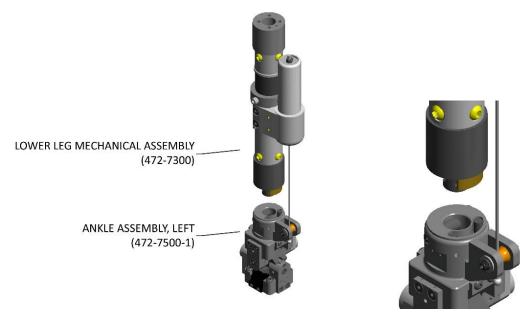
Lower Leg Mechanical Assembly Inserted into Ankle Assembly
